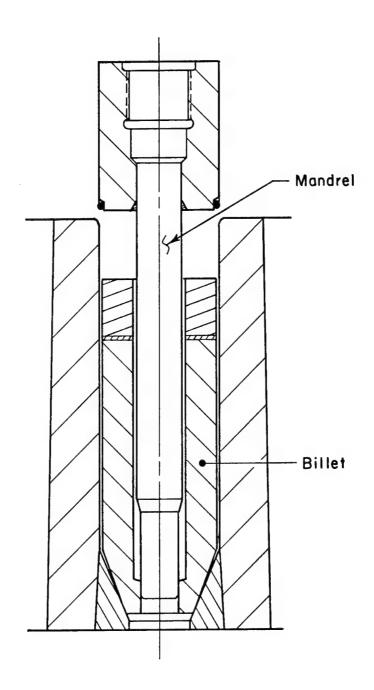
EXTRUSION MANDREL LOWERED TO "SEAL-POSITION"
